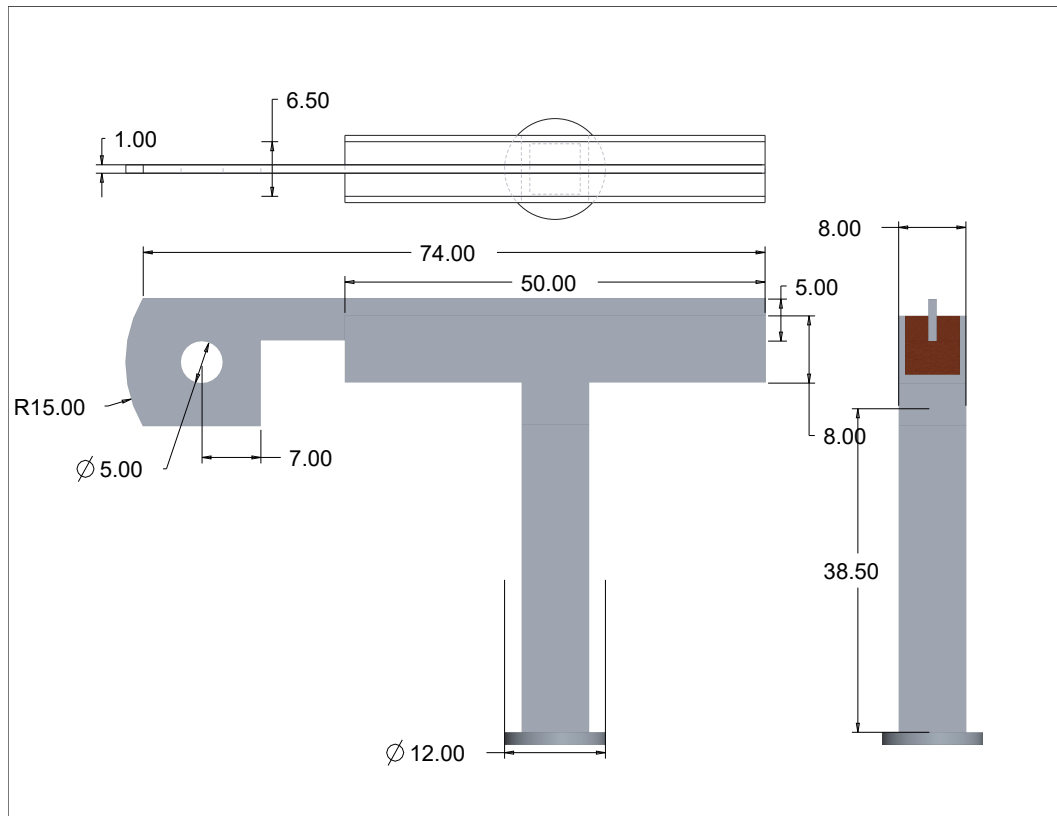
Bottom Tool with various parts(dimensions are in mm)
